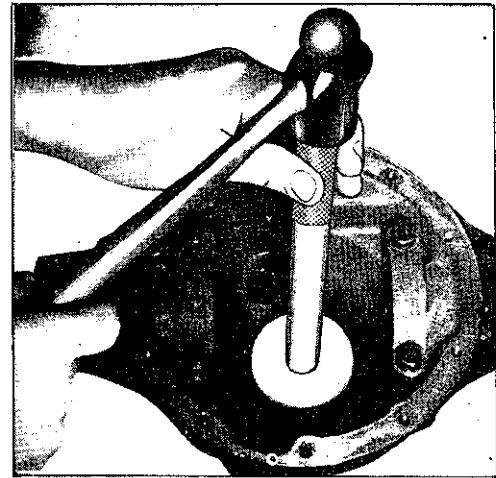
PINION SHAFT REAR BEARING CUP DRIVER
